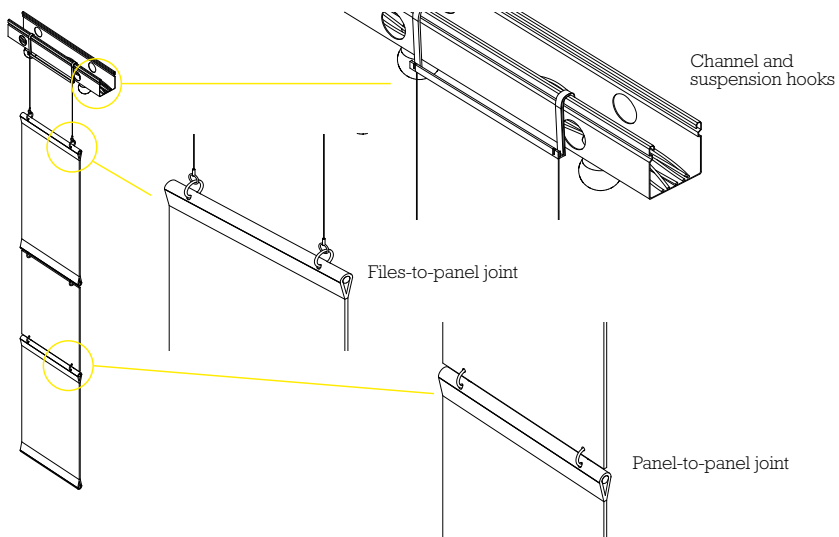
Construction detail - Modular display element and hanging systems | Axonometric views.
